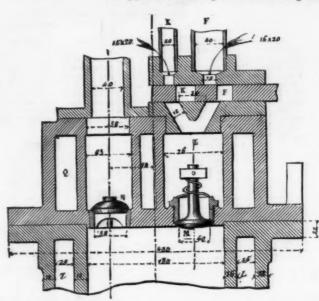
SIMON'S GAS AND STEAM MOTOR. DETAILS OF THE UPPER PART OF THE COMPRESSION CYLINDER.
